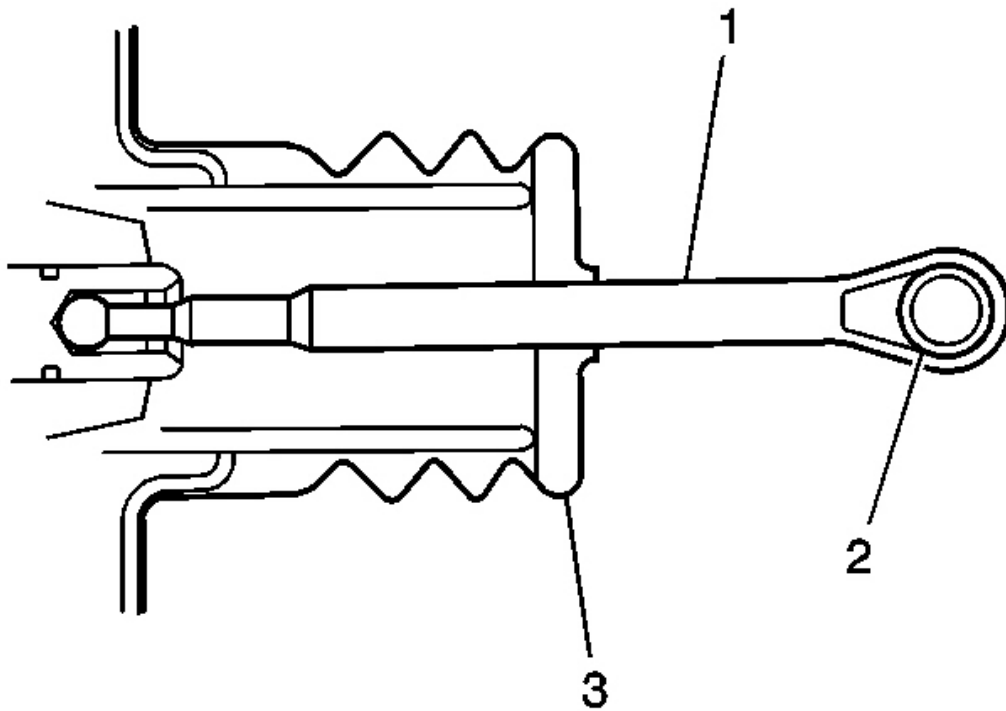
Inspecting Brake Pedal Pushrod Component View
